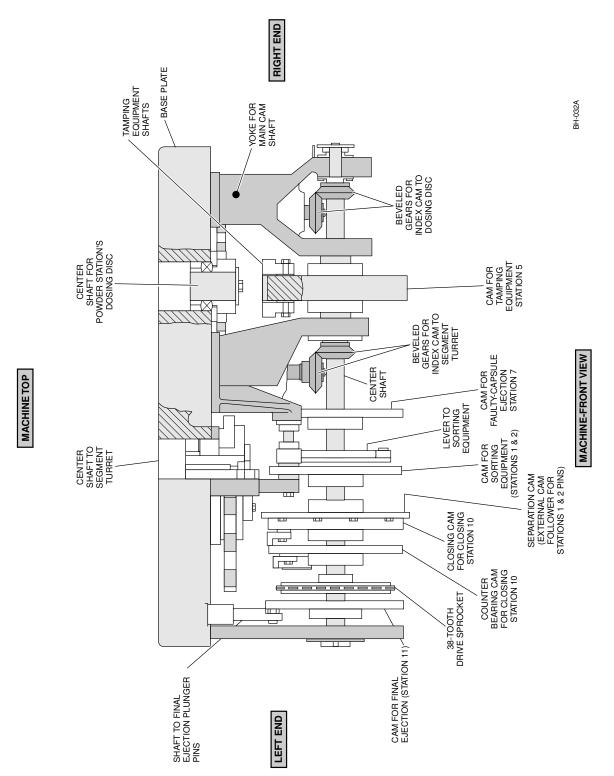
Locations of Main Cam Input Sprocket, Beveled Gears, And Cams
